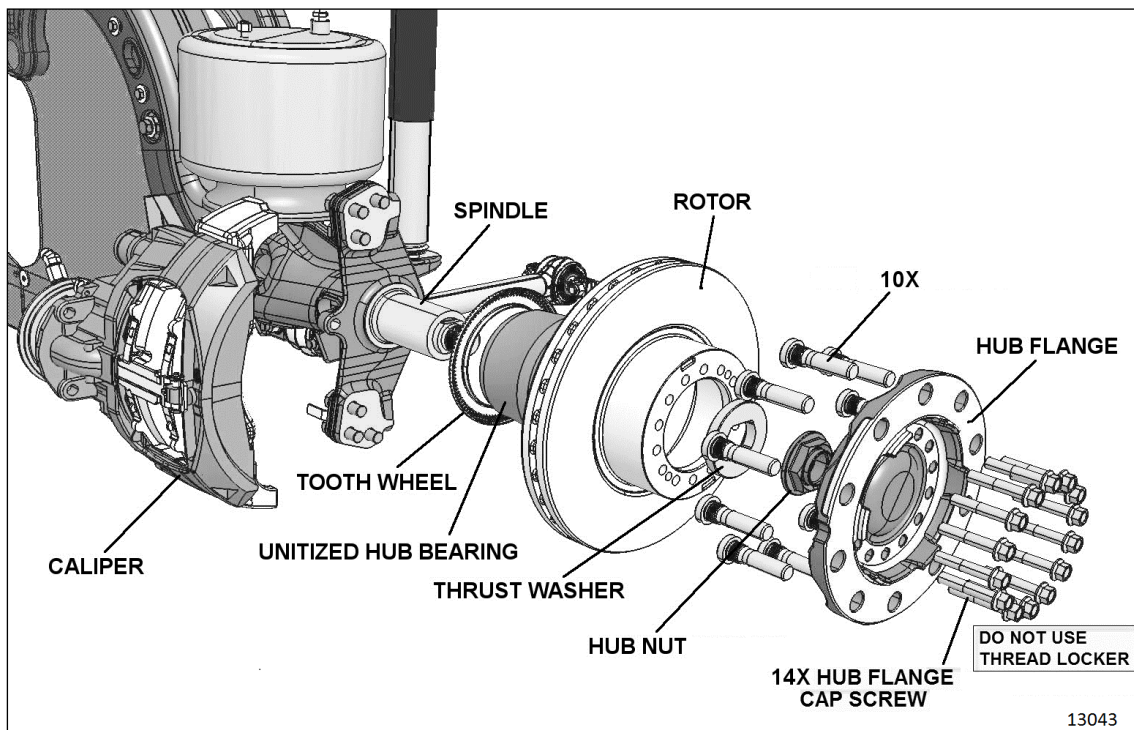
TAG AXLE HUB AND ROTOR ASSEMBLY
